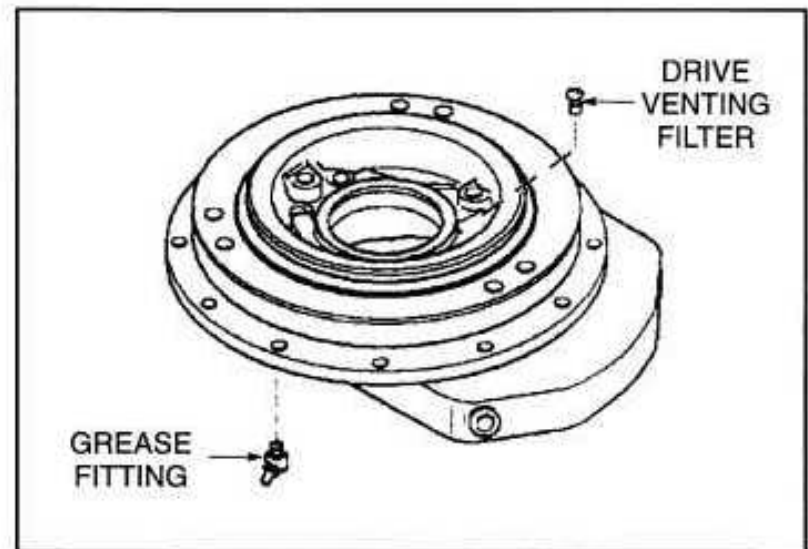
Install Drive Venting Filter and Grease Fitting
